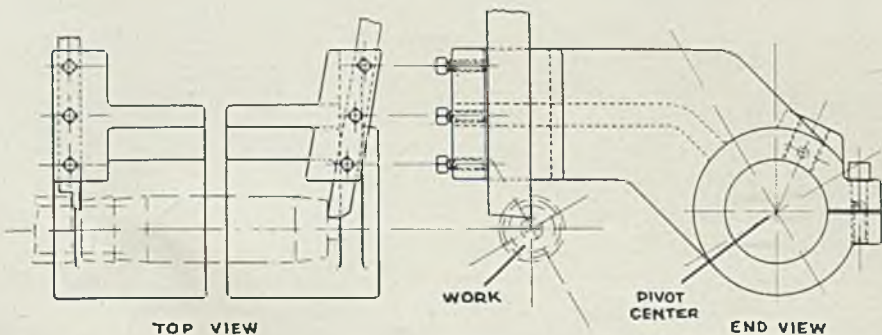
Diagrams of the rocking tool holders and their mounting as set up for facing and cutting-off operations on ends of the shell. View at left is looking down from in front of the machine. At right is an end view from the tailstock end showing how these holders are clamped and locked to the cam-actuated oscillating rod which swings them to and from the work
